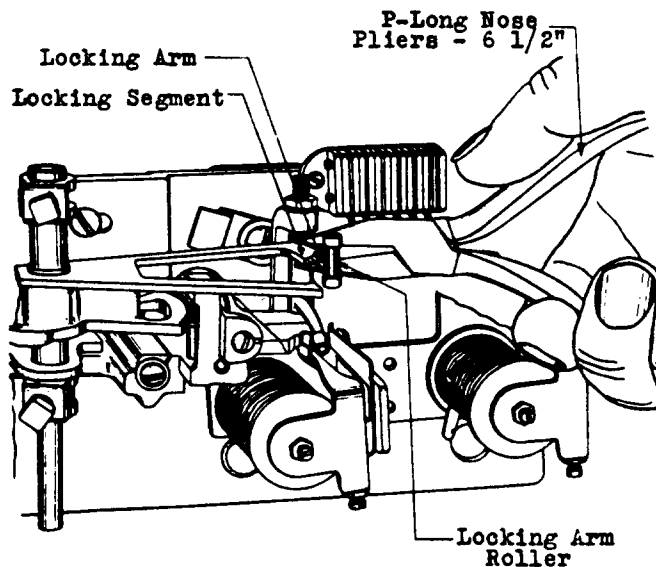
Method of Adjusting Locking Arm Roller to Center Approximately on Locking Segment.
